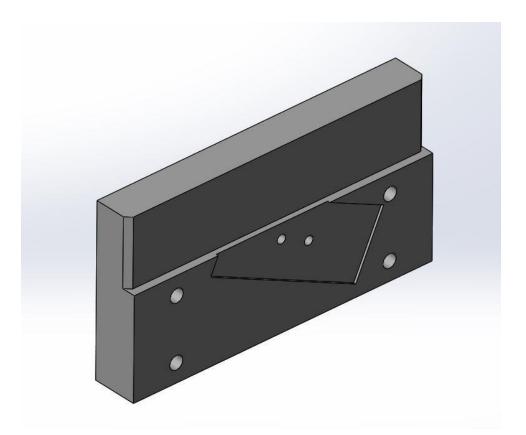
Conveyor Belt Slicer Version 2, Halve-B
